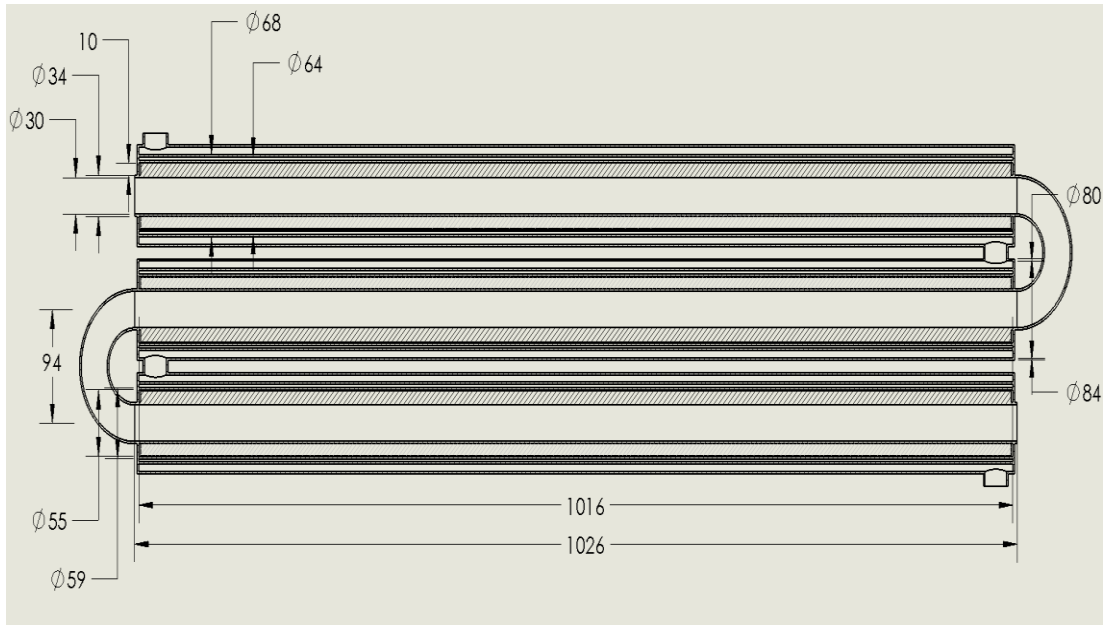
Sectional front view of the concentric tube PCM heat storage setup
